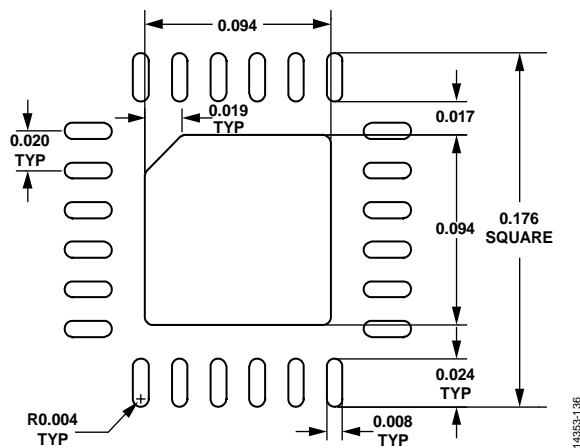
Solder Stencil for the HMC8193 Package on the HMC8193 Evaluation Board
